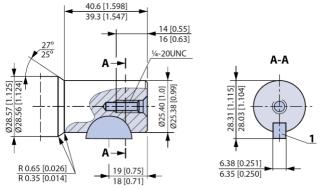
OMP shaft version: Cylindrical shaft 1 in (US version); SAE J502
